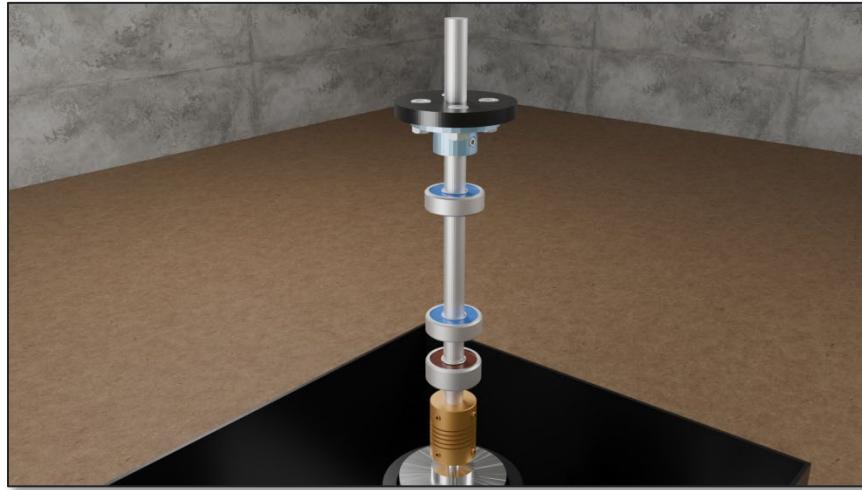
This image is showing how the shaft is connected to the motor with all the ball bearings and the flange. It does not show the support structure that also needs to be in place.
